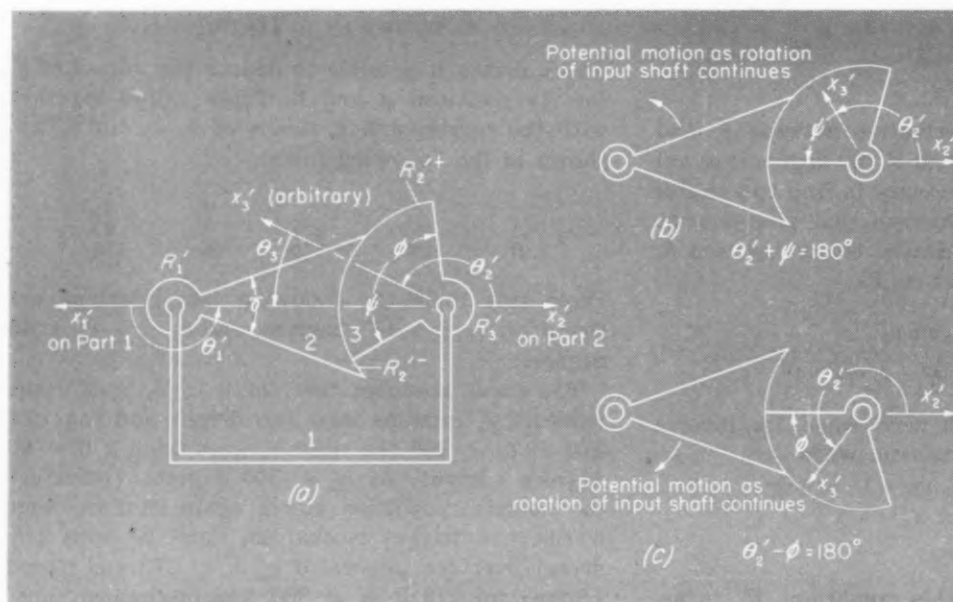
Lock mechanism for problem example. Sketches b and c establish limits of input shaft rotation within which output shaft is locked
